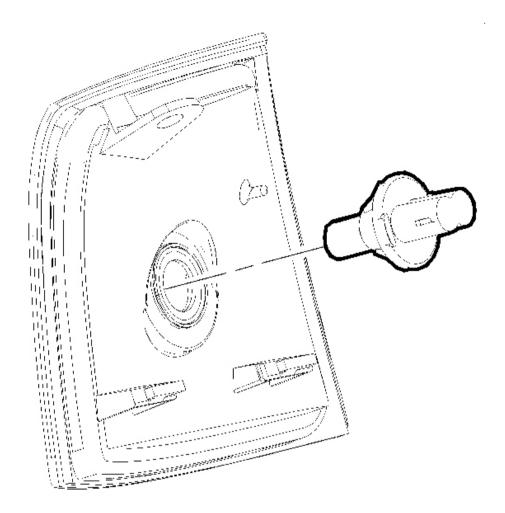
View Of Side Marker Lamp Bulb Courtesy of GENERAL MOTORS CORP.
